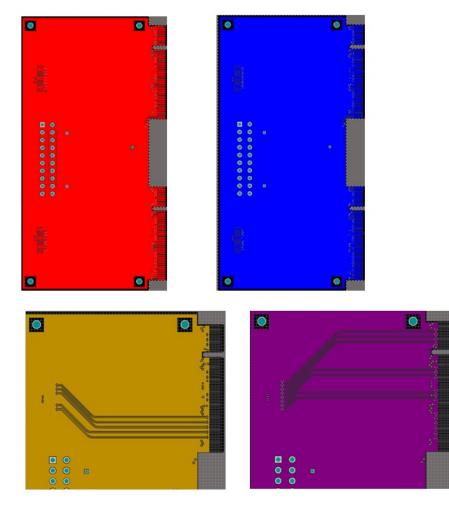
PCB layout of the prototype of the Vacuum Feedthrough Board (VFB). Top left - Top layer and Top right - Bottom layer showing the component placement. Bottom left and bottom right - High-speed signal layer in stripline environment. Credit to Leyre Flores, University of Glasgow.
